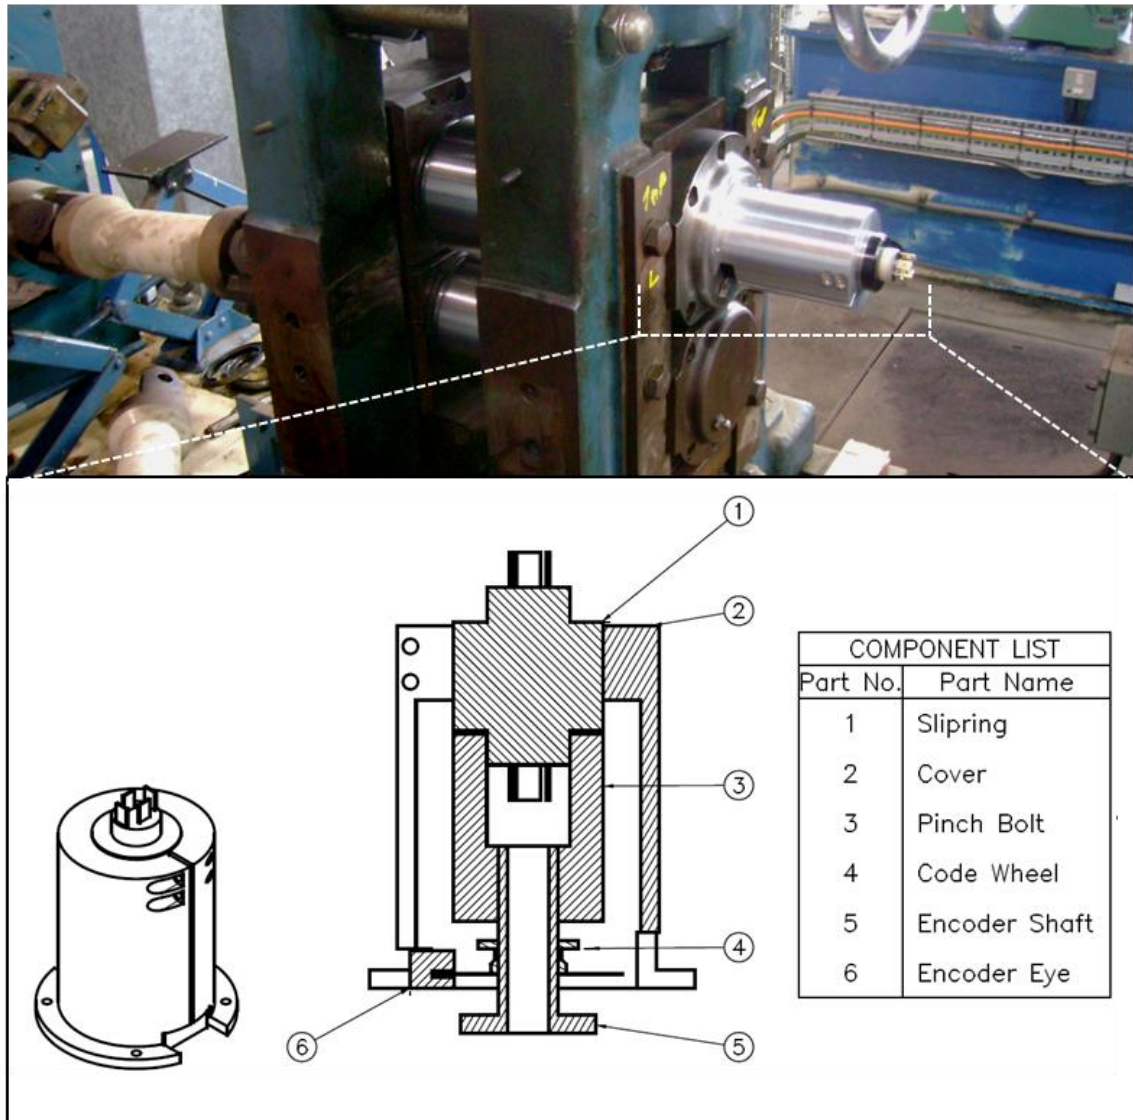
Sheffield Pilot Mill Slip Ring Mounting.
